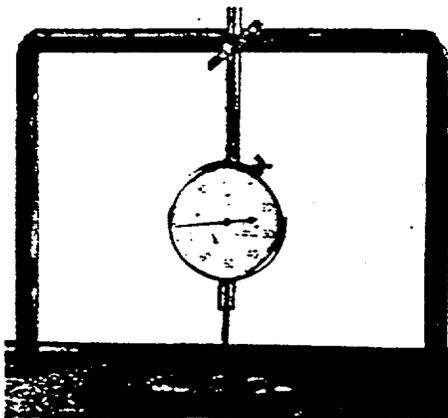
Method for Measuring Weld Metal Thickness at the Bottom of the Notch
